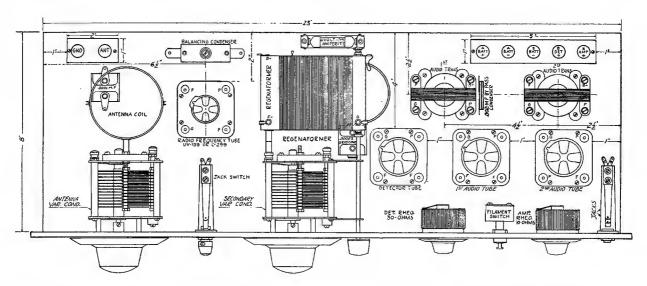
Top view showing arrangement of all parts. Refer to dimensions when mounting apparatus on baseboard
